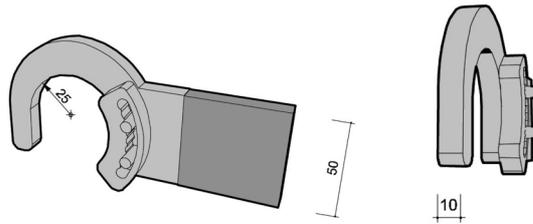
Form and detail of saw-type fixing hook for preventing separation.
